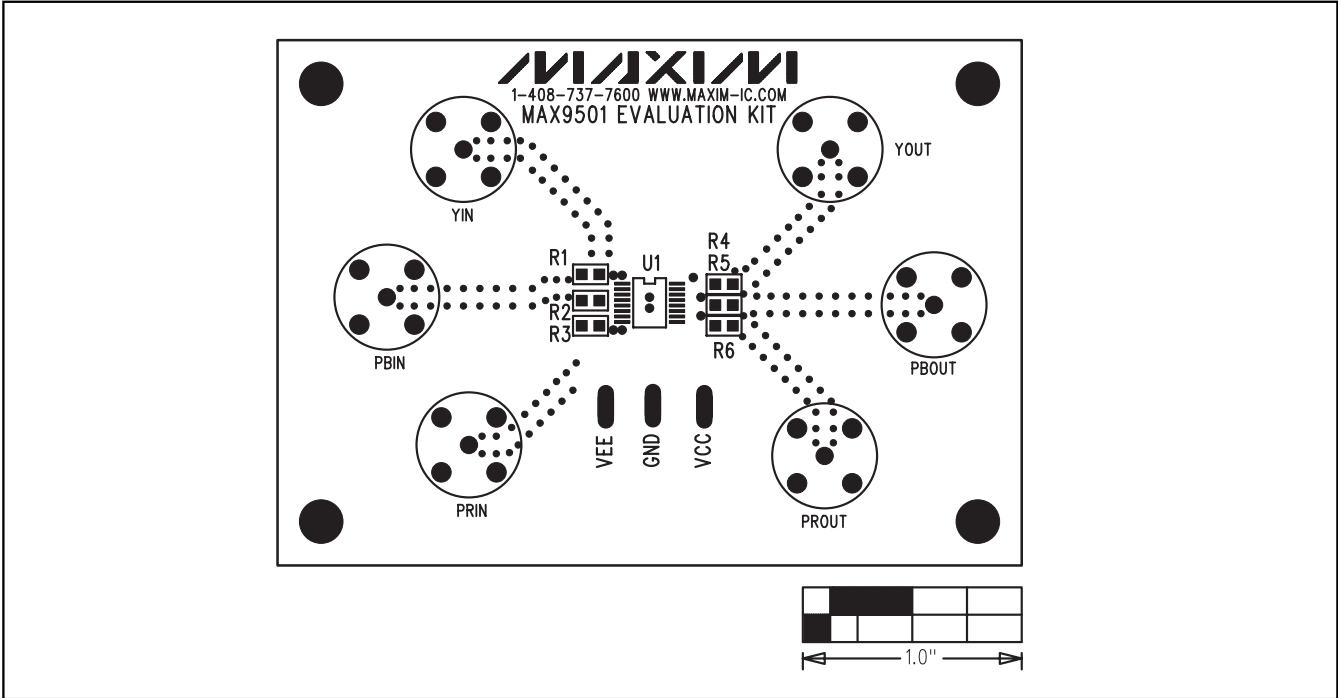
MAX9501 EV Kit Component Placement Guide—Component Side
